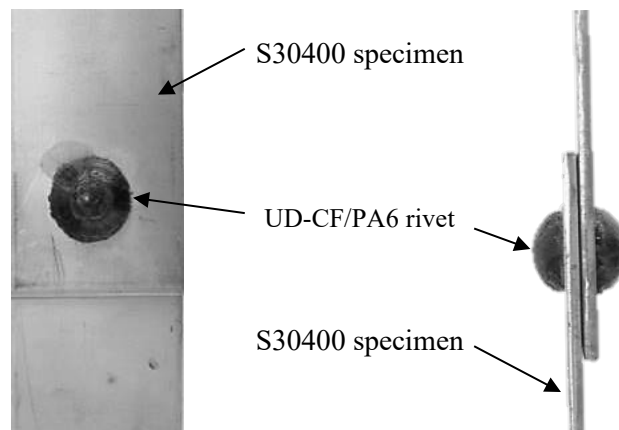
Photograph of single lap shear strength test specimen by UD-CF/PA6 rivet fastening.
